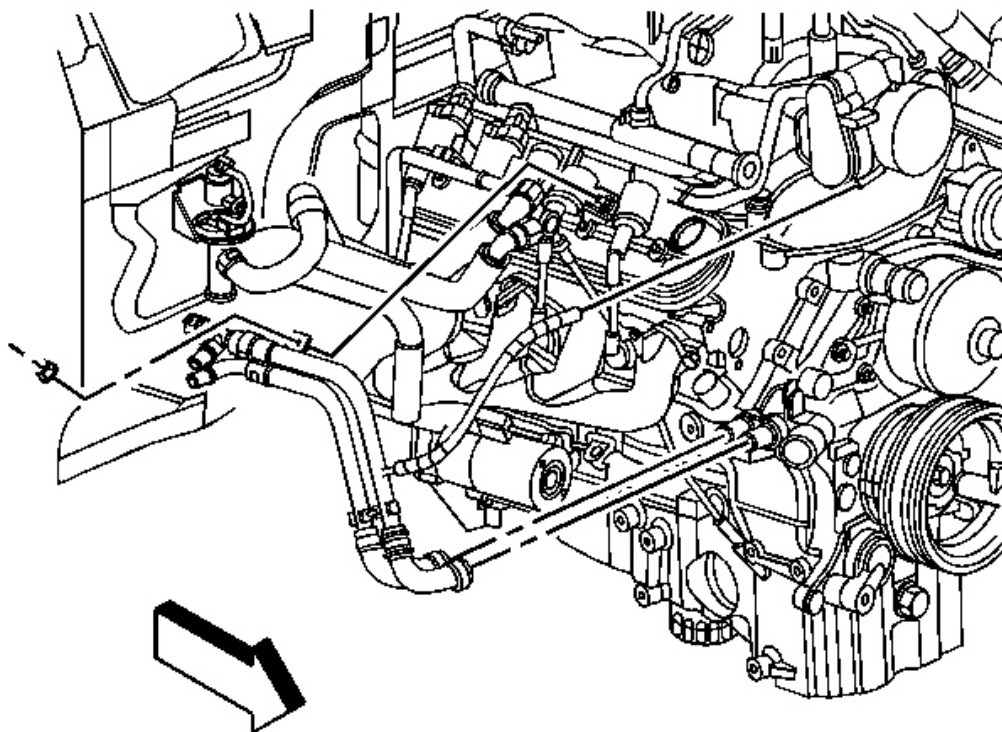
View Of Auxiliary Heater Inlet & Outlet Hoses/Pipes
